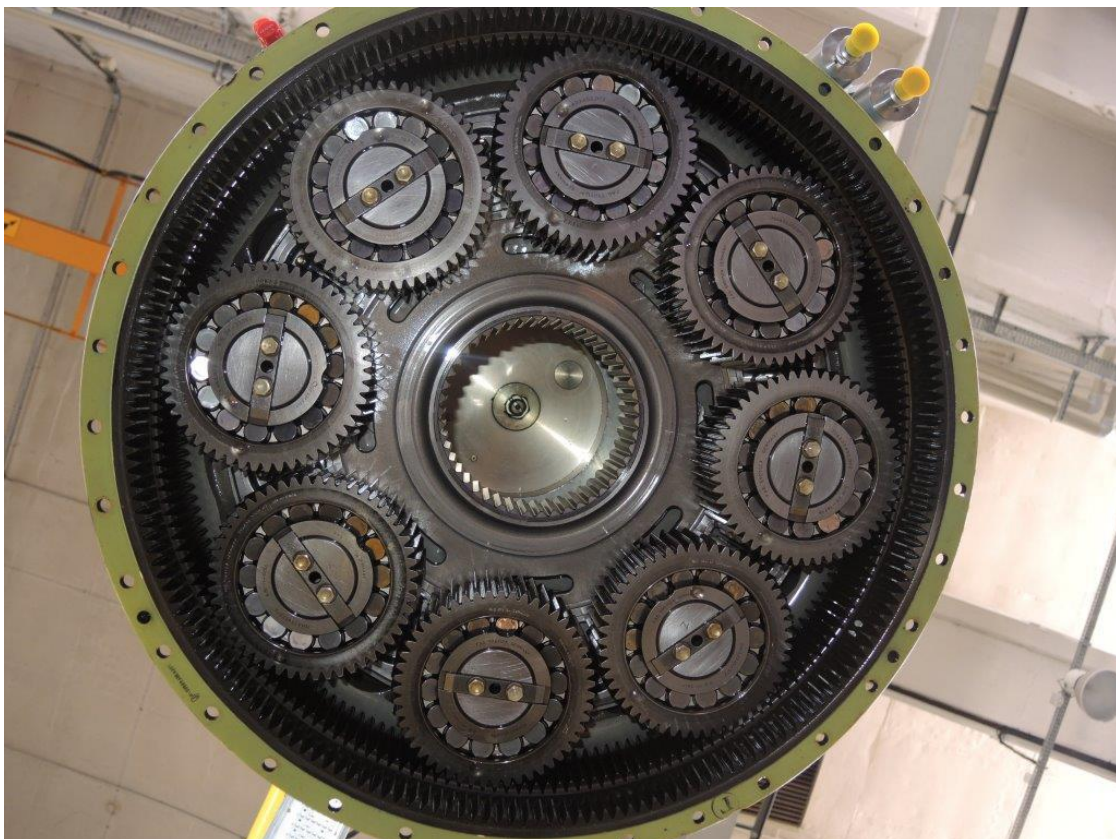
Eight second stage planet gears as fitted on the carrier inside the ring gear, seen from below (first stage gears and carrier is not shown). Photo: AIBN
